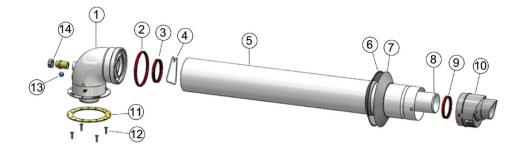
Ø 80/125 mm Concentric Chimney Set
